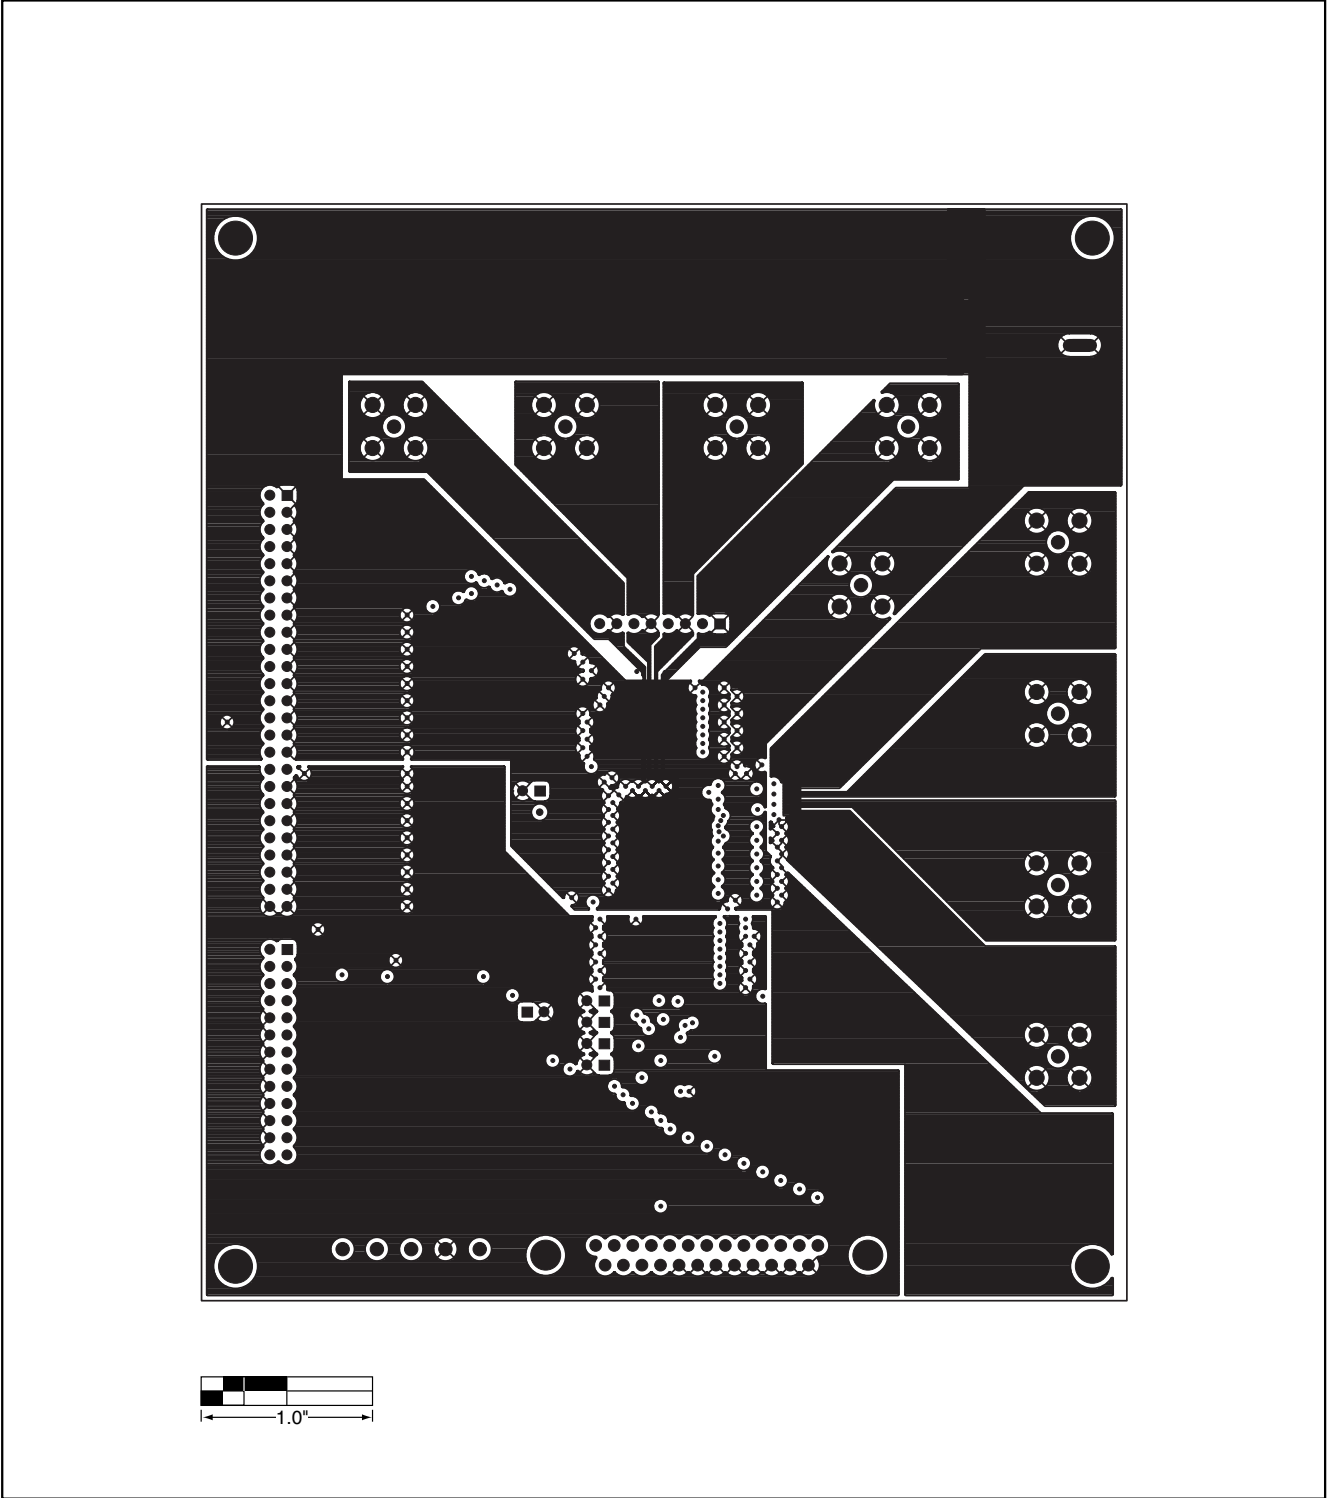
MAX4358 EV Kit PC Board Layout—Layer 2
